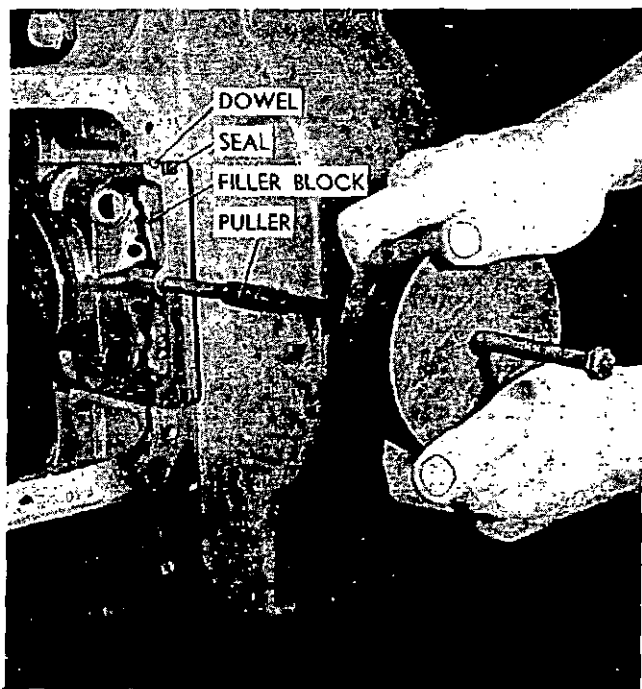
Removing Rear Oil Seal HD-260 & JD-382
